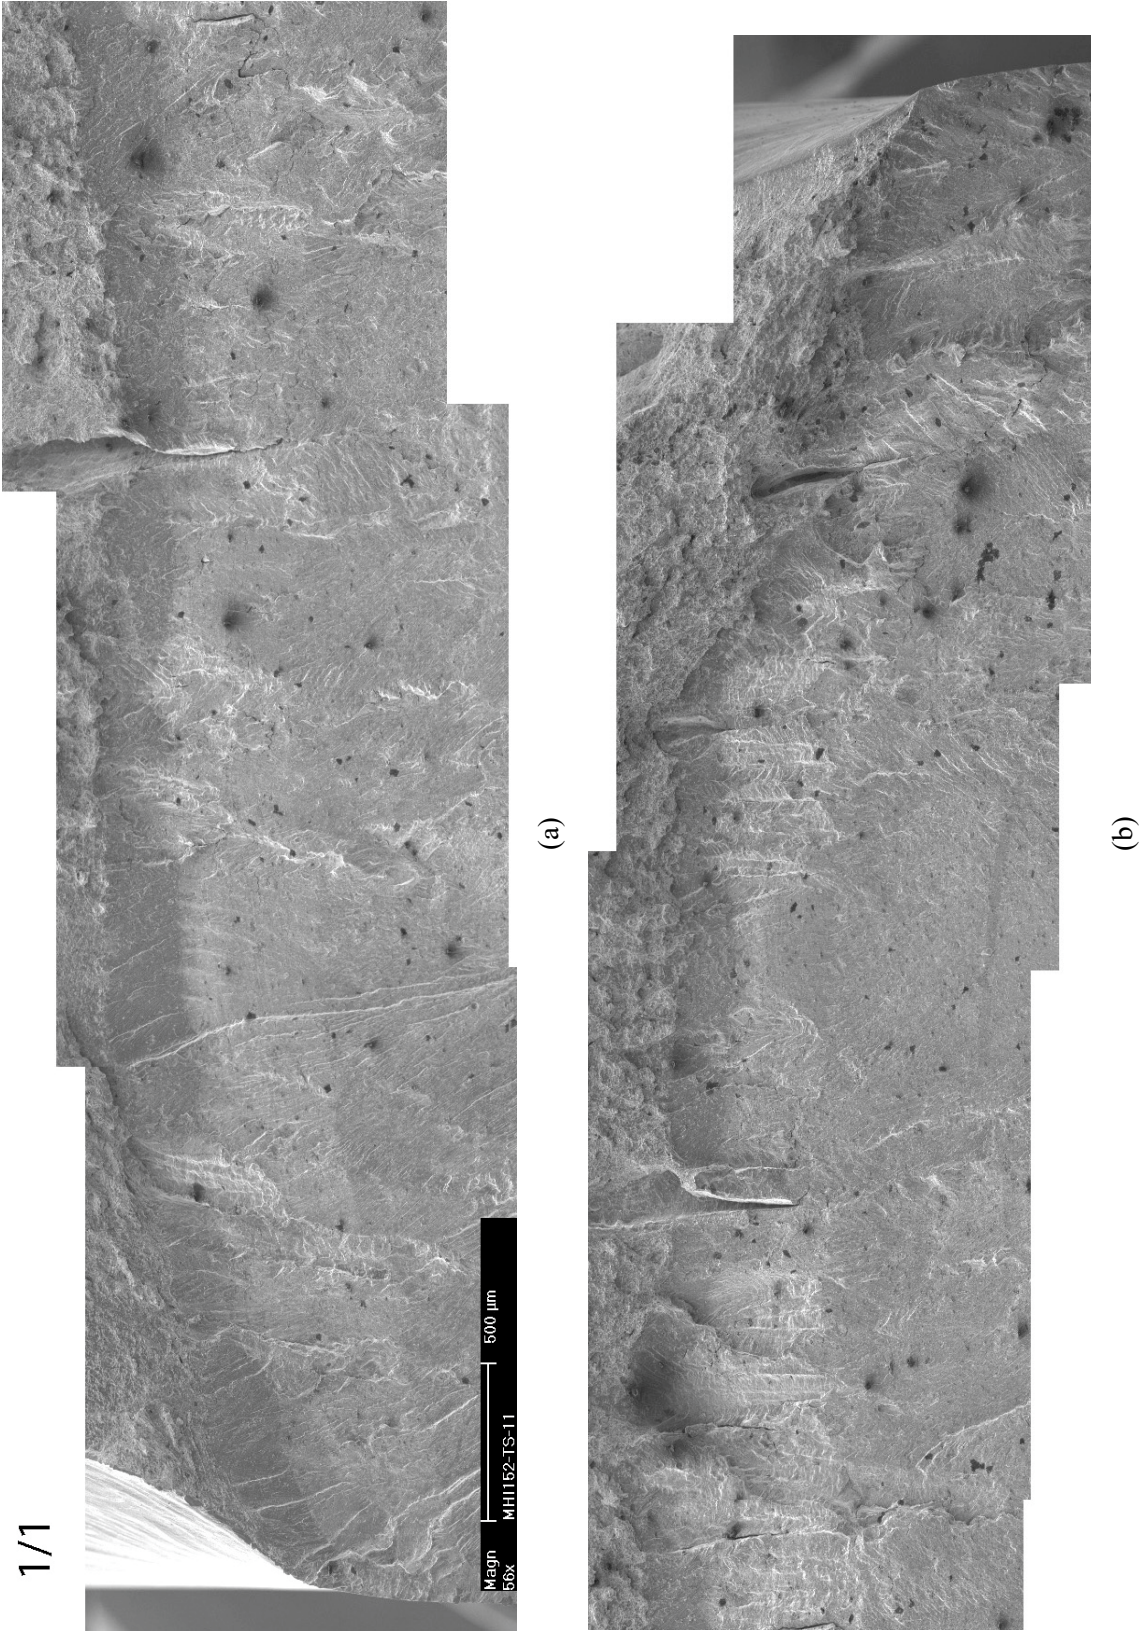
Fracture surface of Specimen MH1152-TS-11 during the final stages of the test: (a) first half, and (b) second half. Crack advance is from left to right.
